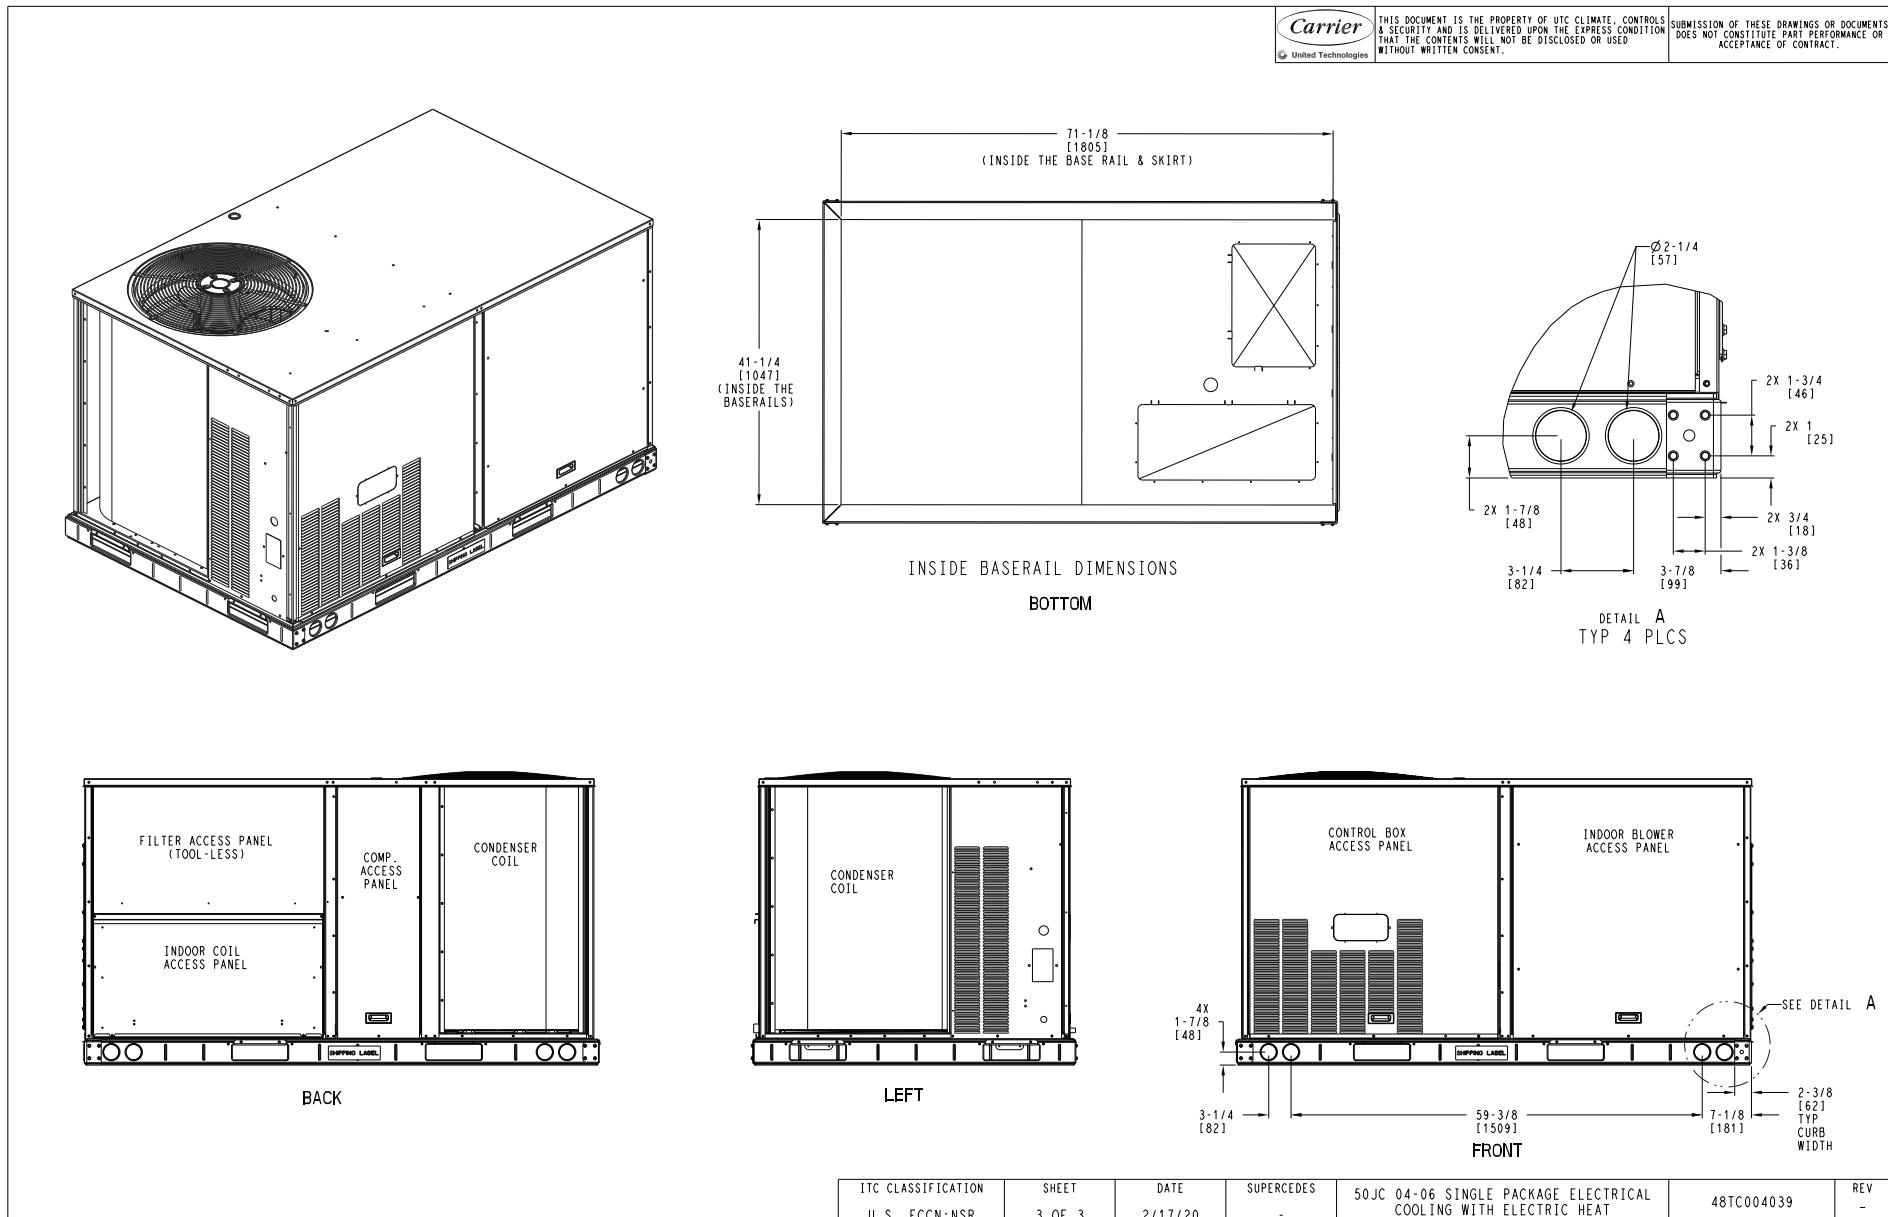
50JC 04-06 Unit Dimensional Drawing (cont)
